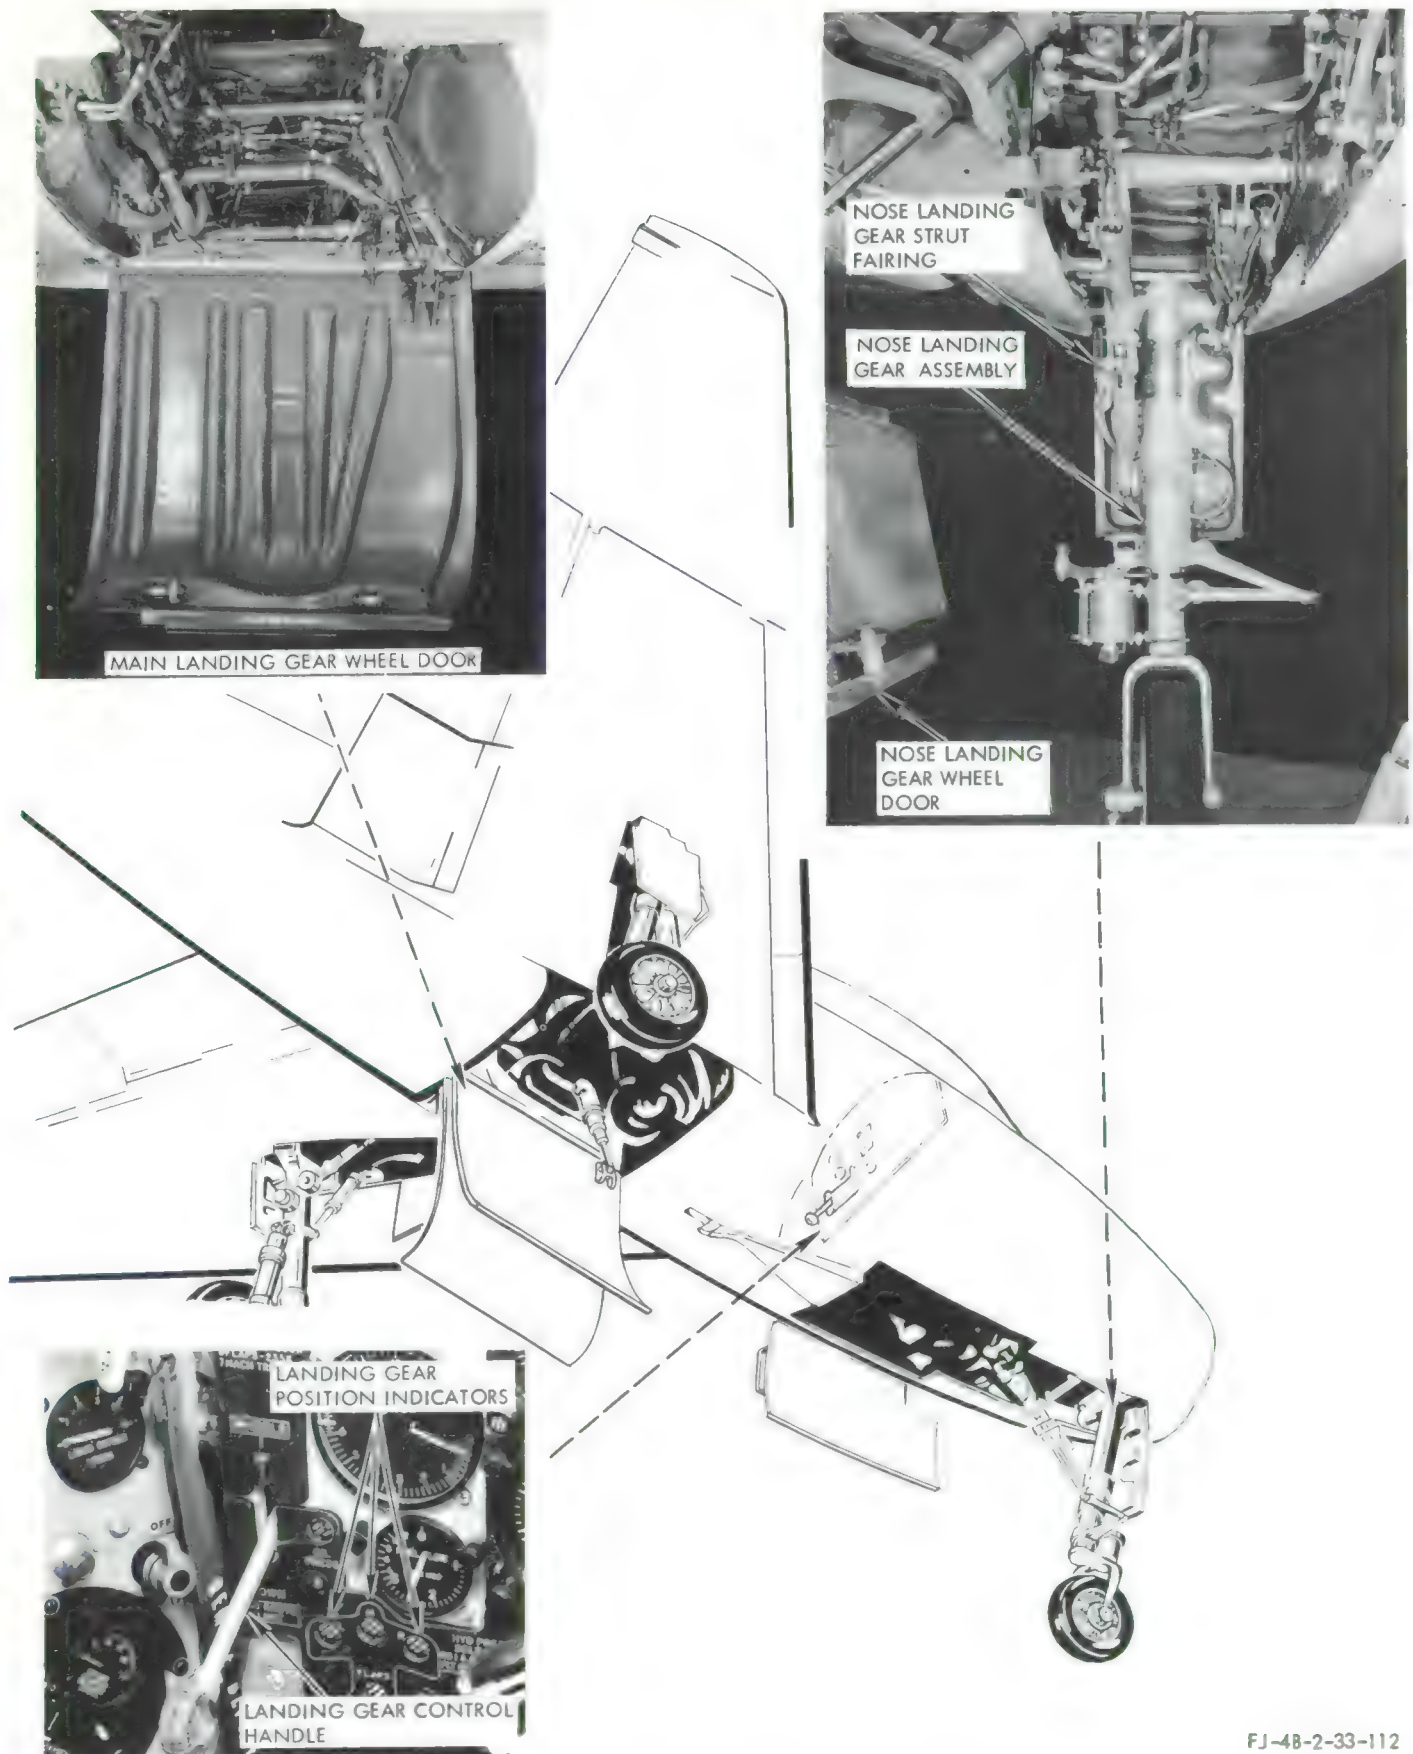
Landing Gear System Unit Location (Sheet 1)
